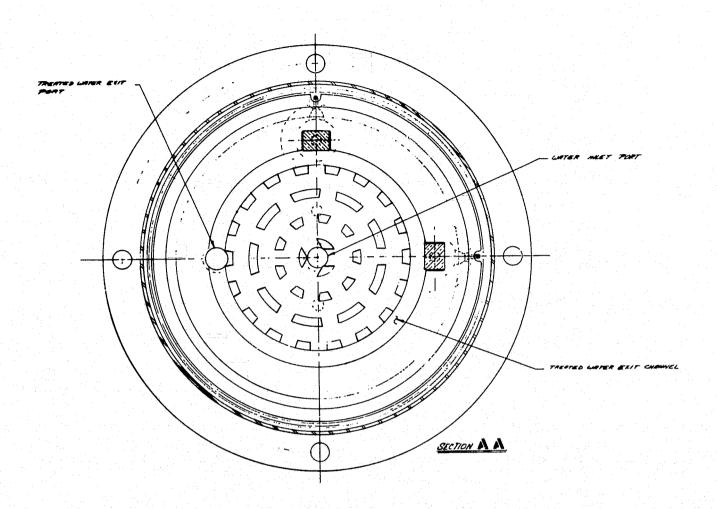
AWIS  $\mathbf{I}_2$  SOURCE ASSEMBLY DRAWING
